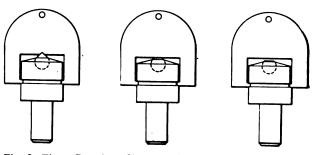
These Drawings Show the Diamond Gage Placed on a Tool Provided with a New Diamond, a Tool Where the Diamond is Ready for Resetting and Again Where the Diamond Has Been Worn Below the Safety Level
